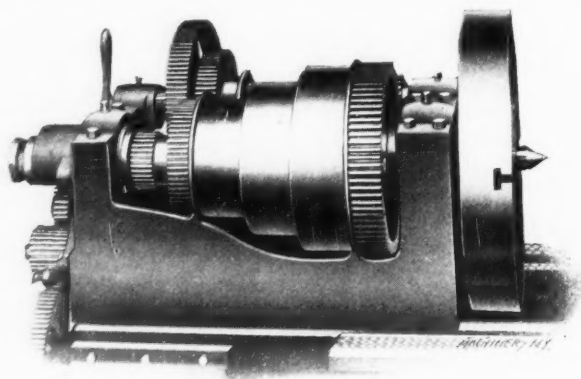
Head-stock, with Guard Removed, showing Gearing.
